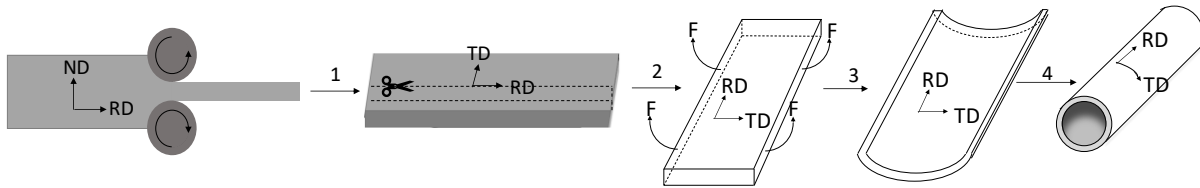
Product process from slab to tube. Slabs are cold rolled into sheets (1) that are further cut into strips (2). These strips are bent (3), welded together and heat treated to obtain a tube (4). This product is then delivered to Tetra Pak.
